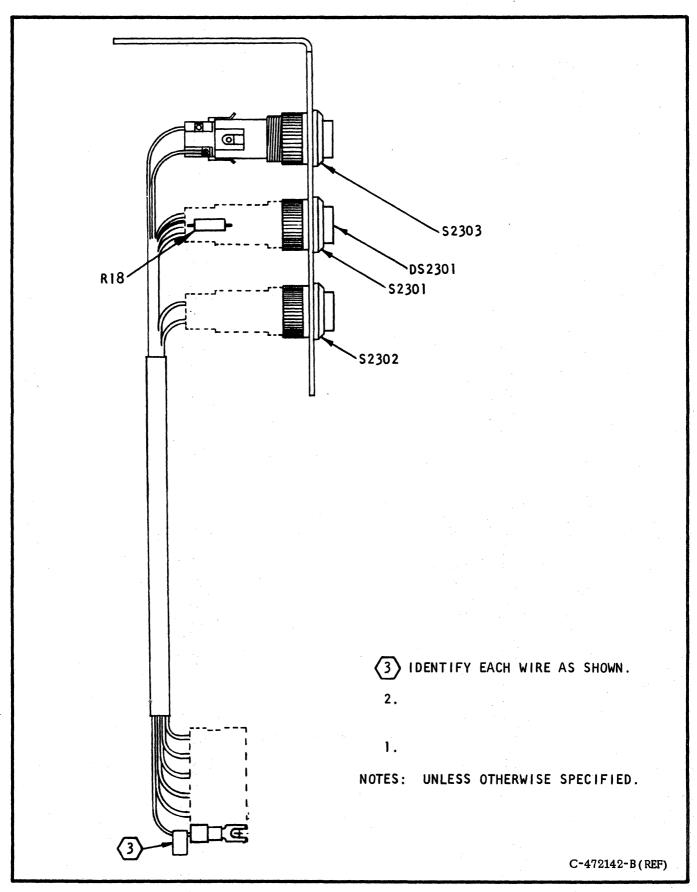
Shuttle Control Assembly Control Panel and Cable
